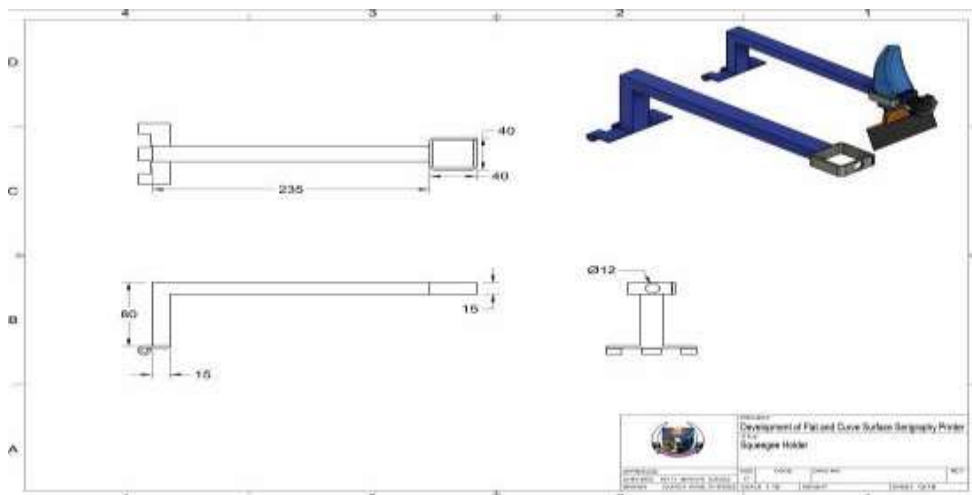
Detailed Drawings of the printers' squeegee and the holder
